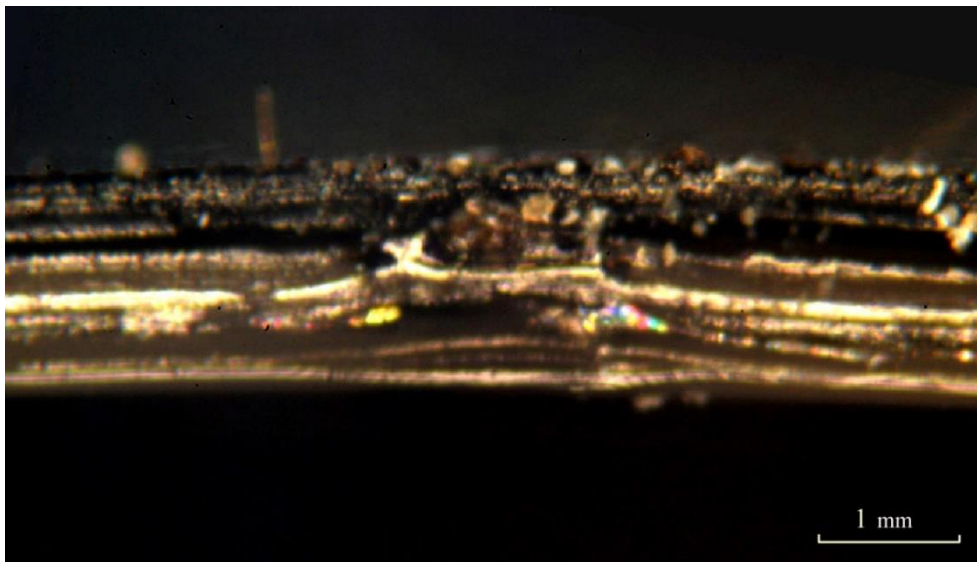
Cross-section of two polyethylene films joint performed by transmission laser welding
